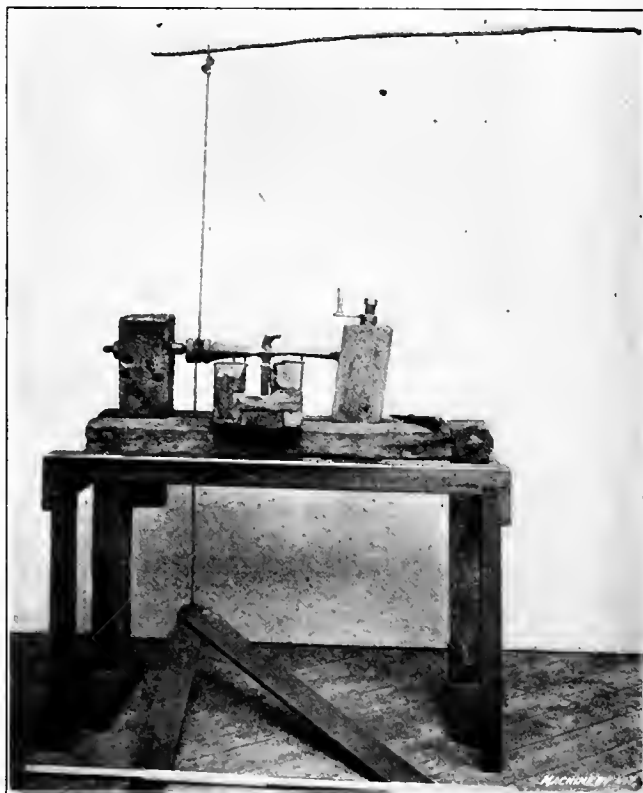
Pole Lathe in South Kensington Museum, the Oldest Form of Lathe Known. This Lathe was in Active Use until about 35 years ago
